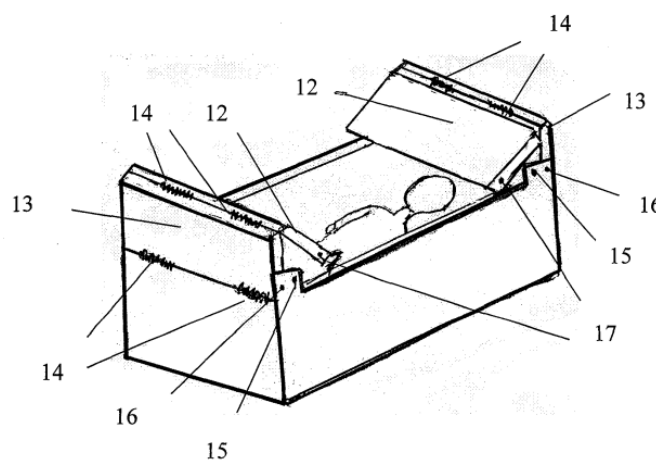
12-Mankind; 13-Bedding lower section; 14-Spring hinge; 15-Screws; 16-Locking mechanism; 17-Emergency locking mechanism.
